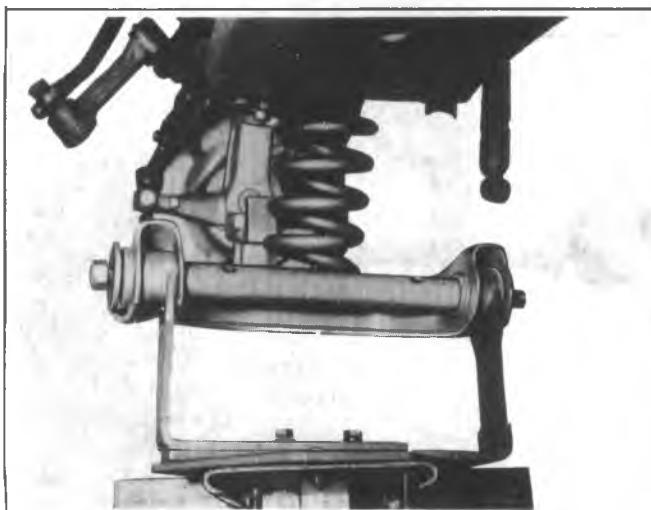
C-24--Lowering Control Arm for Bushing Replacement
